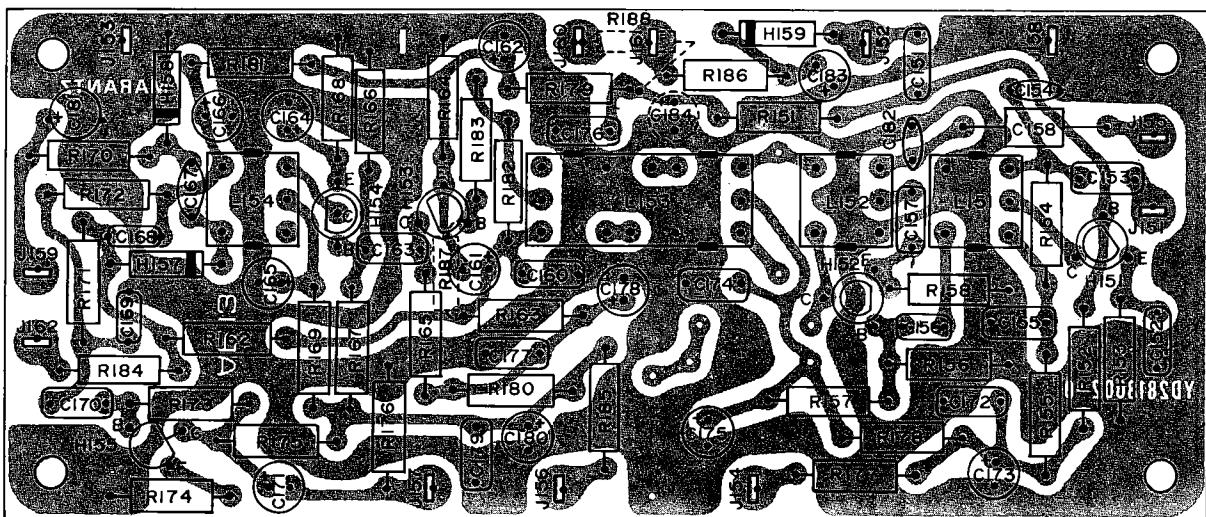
AM Tuner Unit Assembly P150 Component Locations
